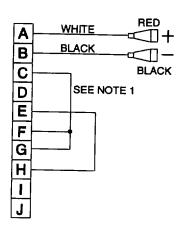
POWER ADAPTER ASSEMBLY (80-10111)
